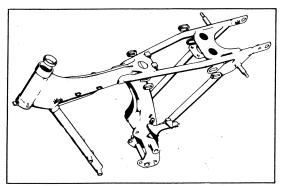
CB100, CL100, CB125S, CD125S Diamond frame
